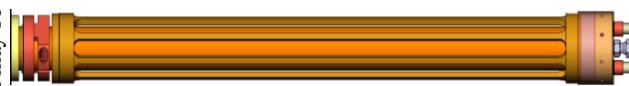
Initial extractor design assembled on the 15-cm copper cathode magnetron.
